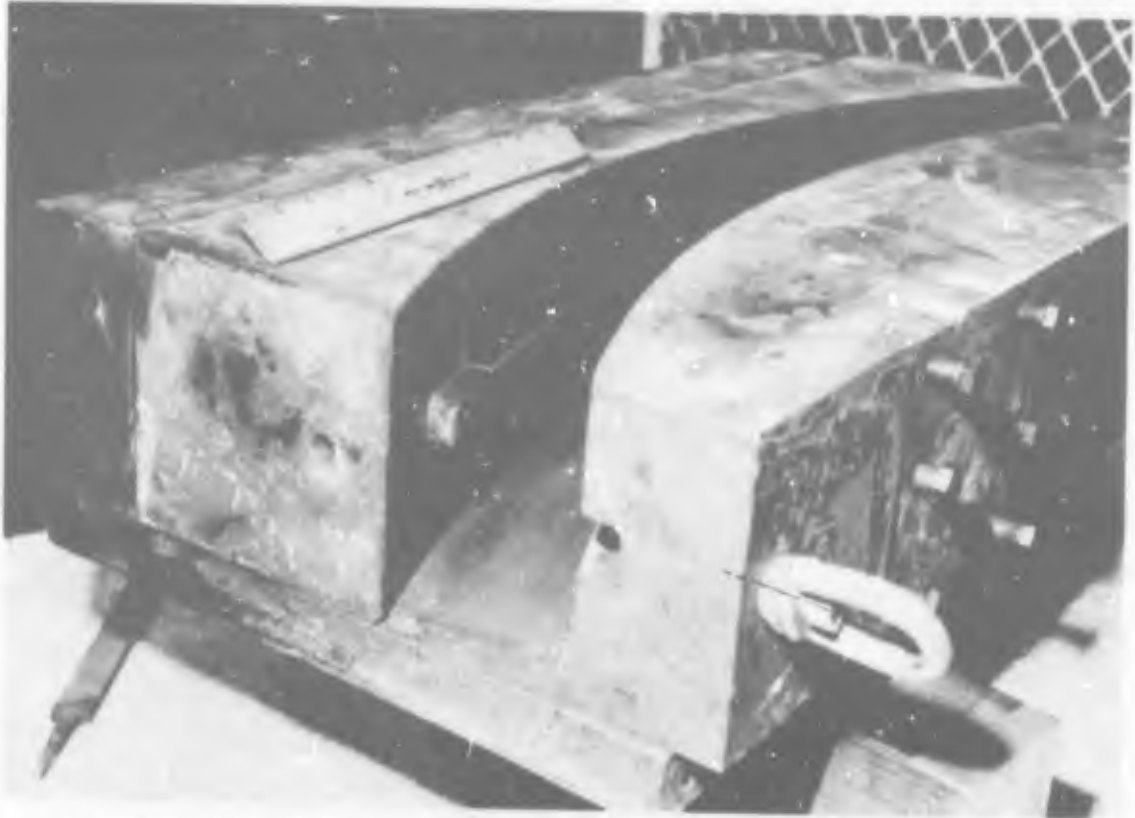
The Finished Formed Part is Checked on the Cold Die
